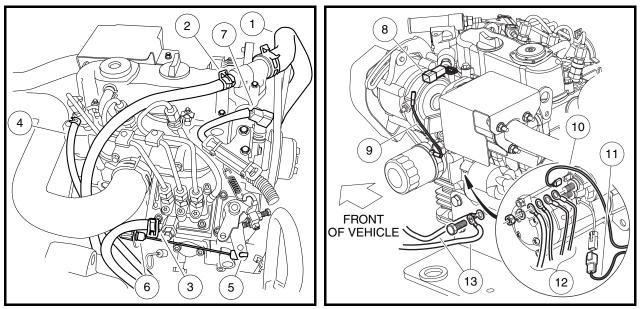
1 Disconnect Coolant Hoses, Fuel Lines, Accelerator Cable and Fuel Solenoid Valve Connector
